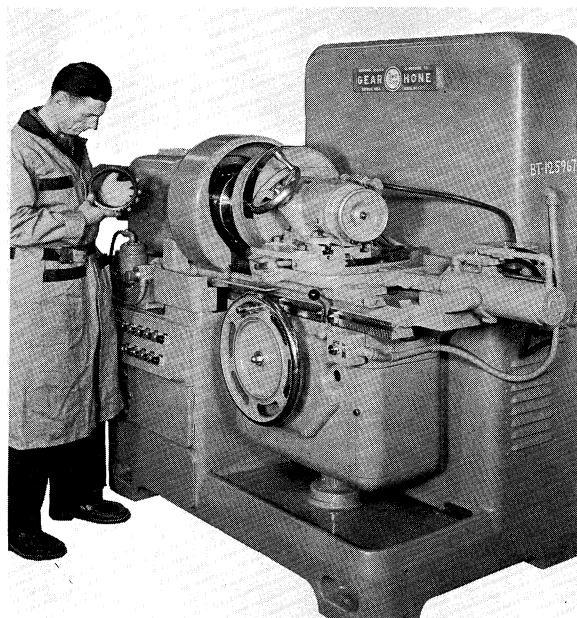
A machine for honing internal gears up to 12-in. diameter.
